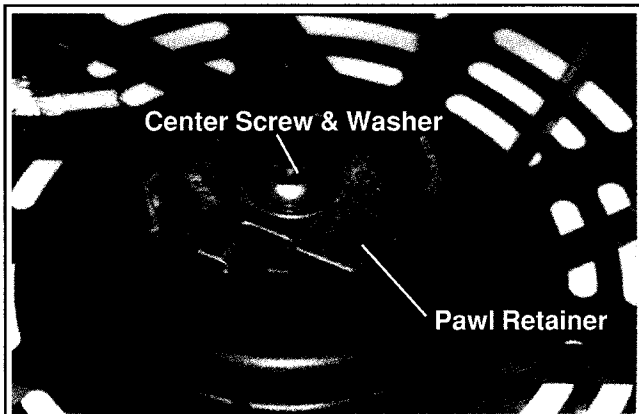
Center Screw, Washer and Pawl Retainer.
